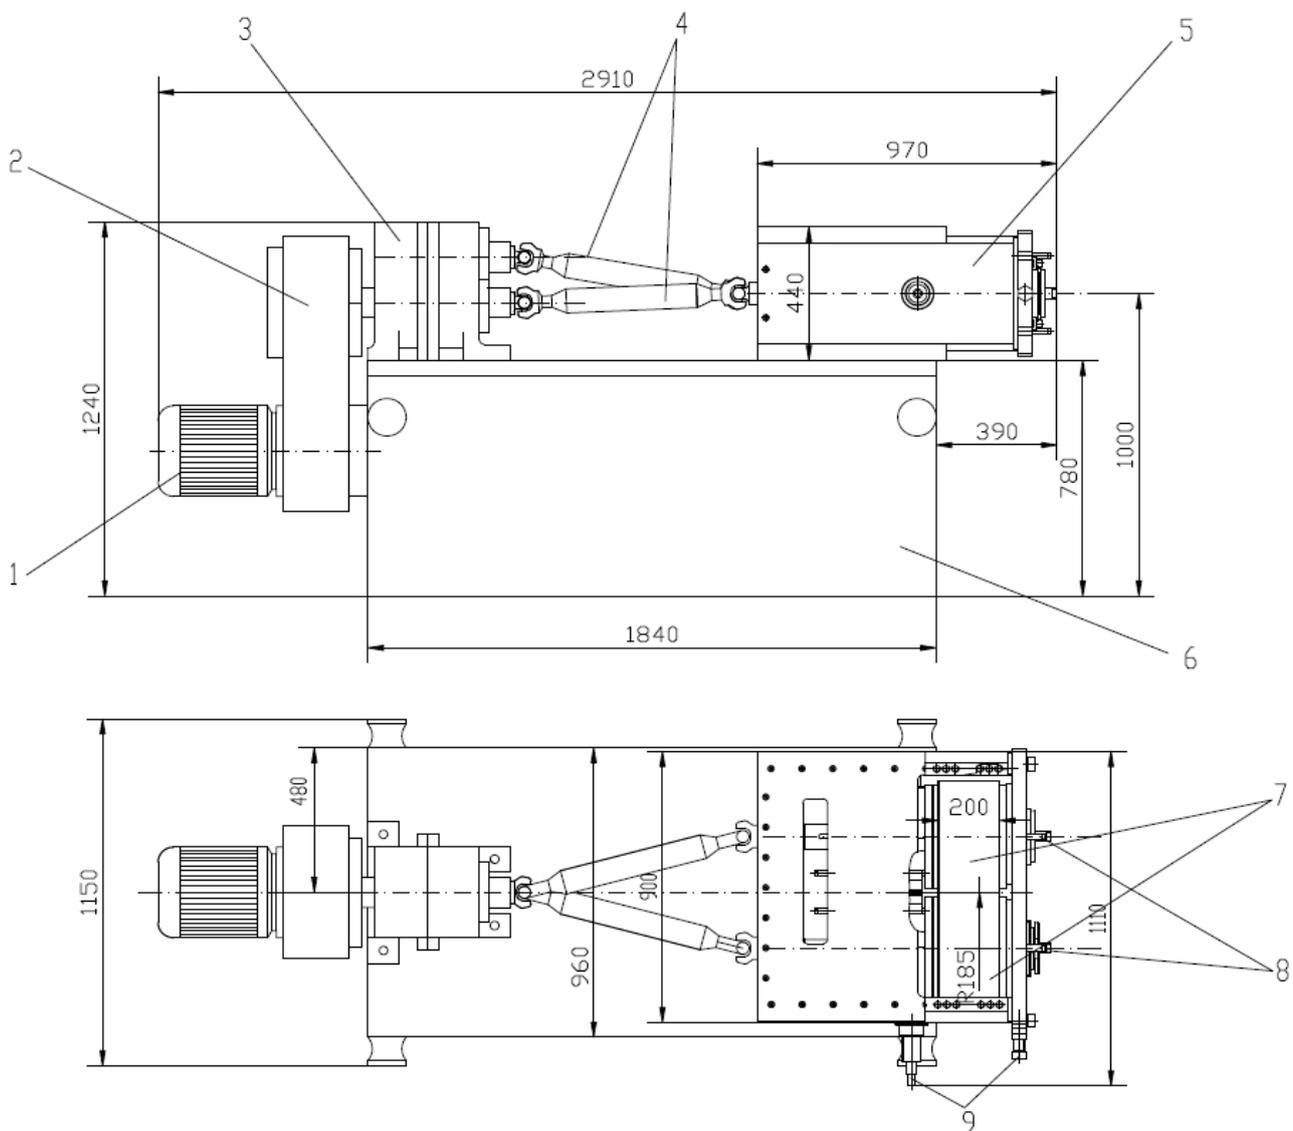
The main line of designed experimental twin-roll caster: 1 - ac motor, 2 - reduction gear, 3 - drive shaft stand, 4 - cardan shafts, 5 - twin-roll casting mill, 6 - frame, 7 - roll-crystallizers, 8 - cooling liquid connection, 9 - jack screws
